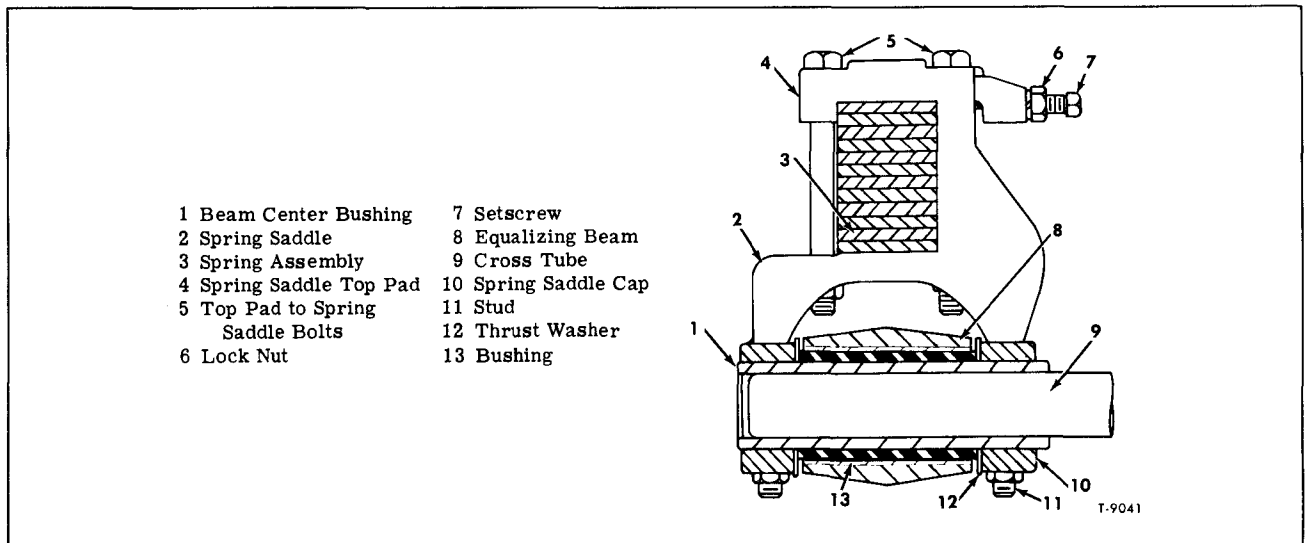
Section Through Spring, Saddle, and Beam (Hendrickson RT)
